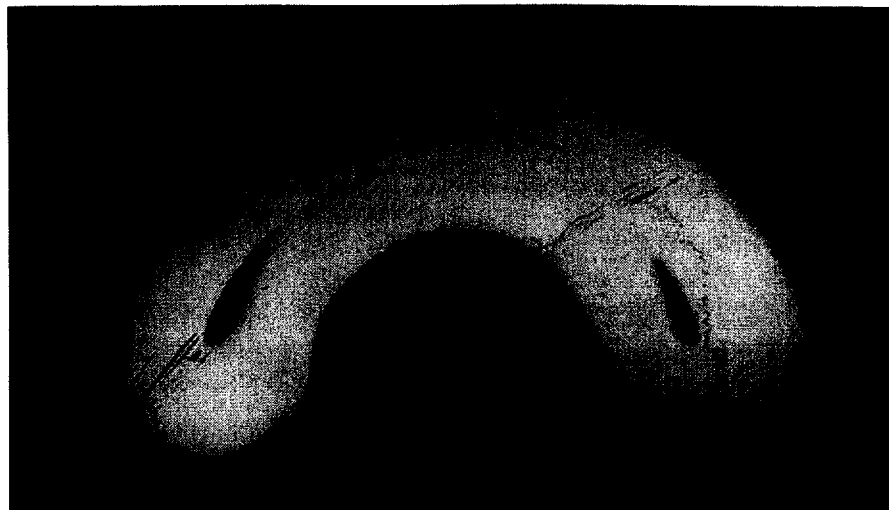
Enlarged view (45×) of the copper tube used to crimp the W-Rh wire in place. The 50 μm diameter wire is clearly visible slightly out of the central region (on the left hand side). The large openings at the edges of the C-shaped crimp are not typical. During the production these openings were much smaller and in Frascati they improved further upon the crimp jaws and they find hardly any visible openings.
